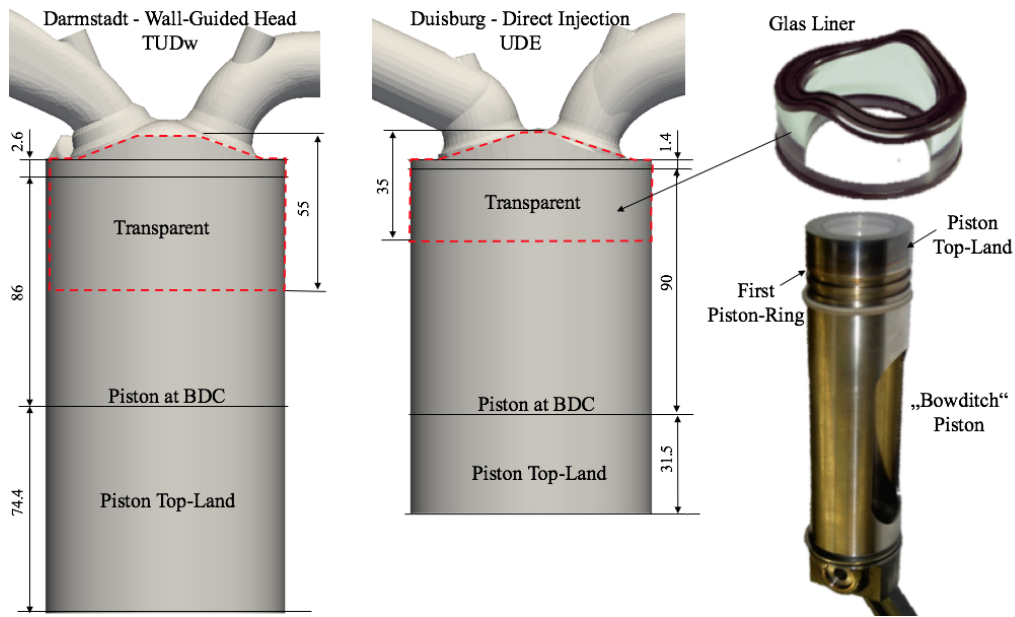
Geometrical details of the cylinder piston assembly of the optical engines. The transparent part of the liner is spotted by a red box.
